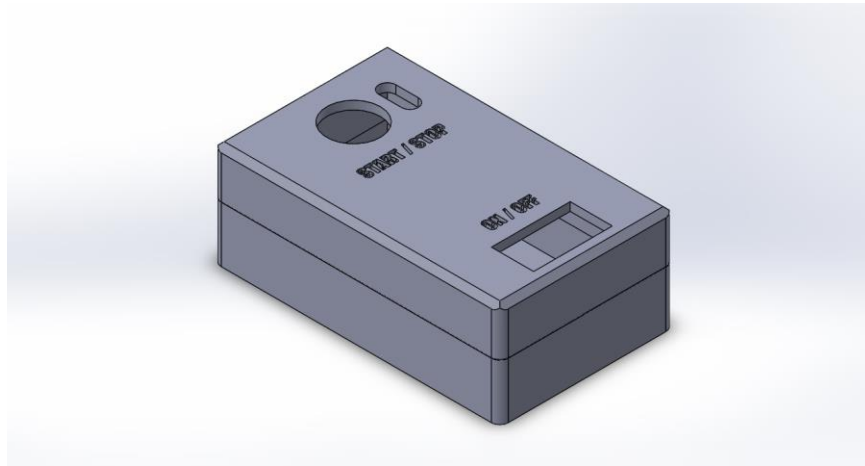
3D DESIGN OF KILL SWITCH
